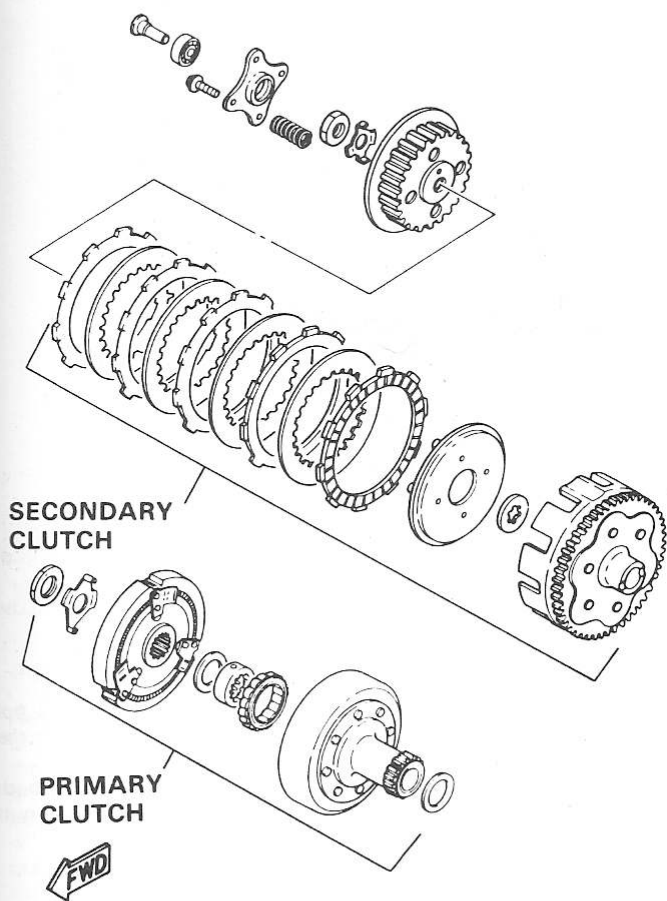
B.28 Clutch components — exploded view (Sec 14)
